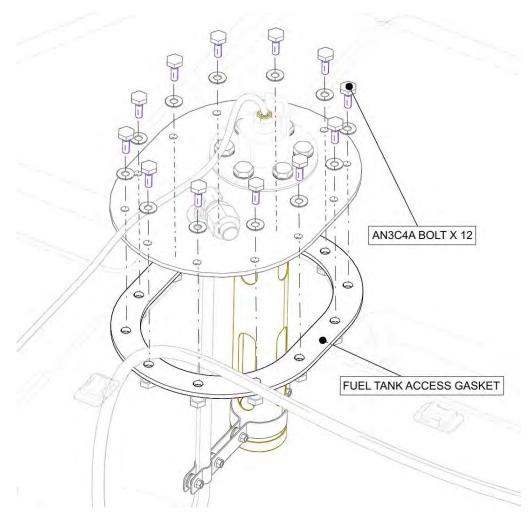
REMOVE FUEL TANK ACCESS PLATE
